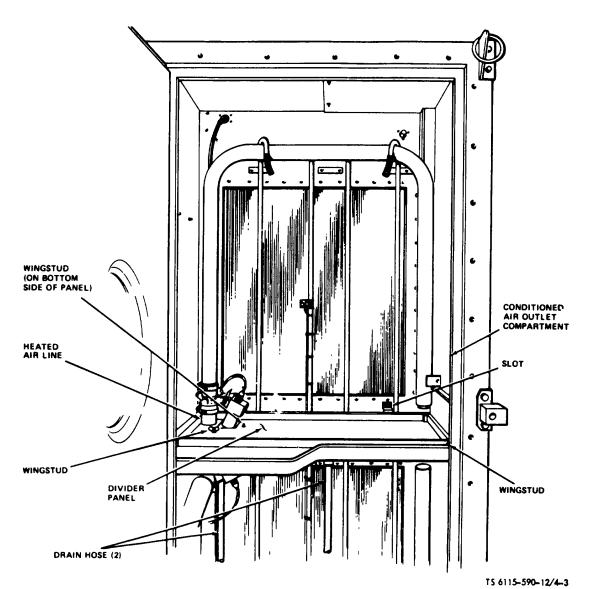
Conditioned Air Outlet Compartment Divider Panel Installation. (TS 6115-590-12/4-3).
